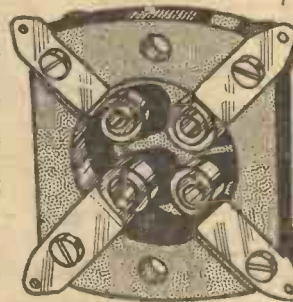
An example of a genuine soldering lug. They are made in one piece with the valve sockets.
